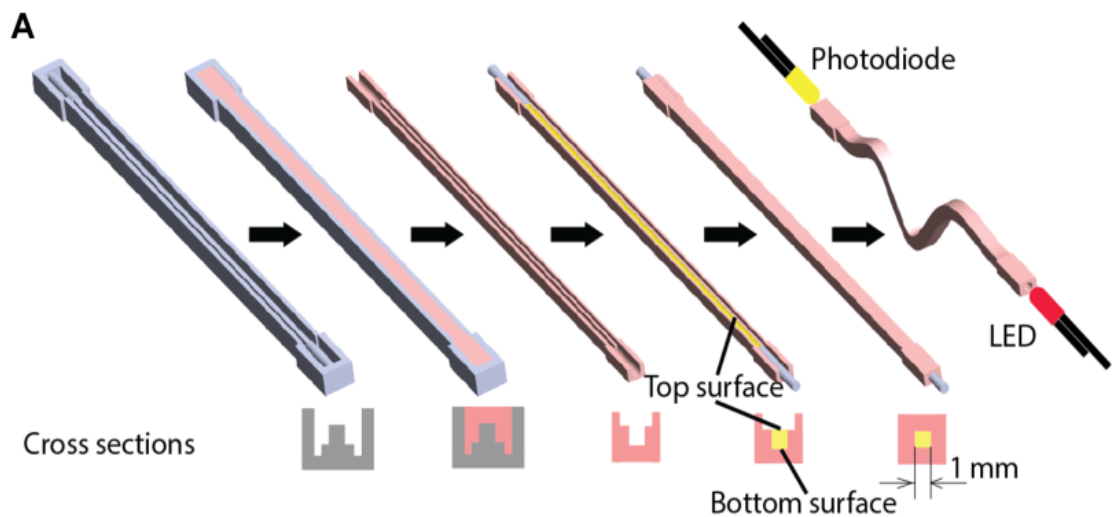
Elastomer casting steps for optical waveguide fabrication [1]
